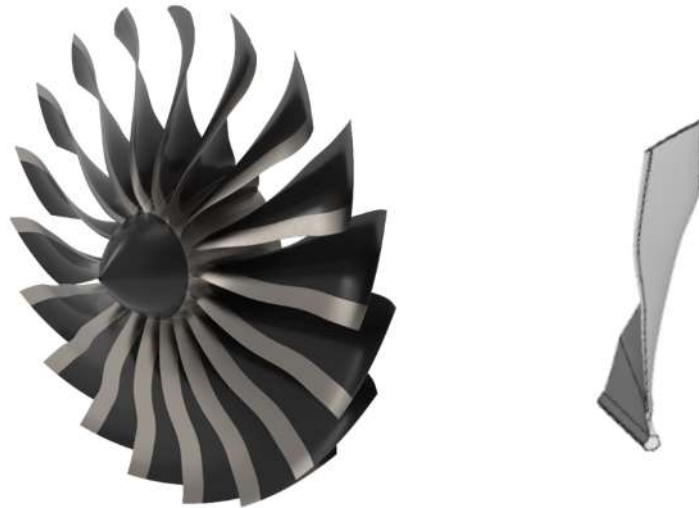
Fan blades assembled on the rotational assembly of the Jet Engine.
